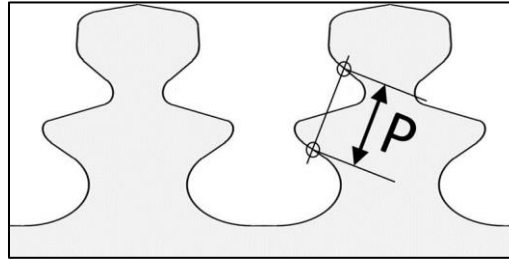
Pressure Face Spacing (P) in a Multi-Lobed Axial Blade Attachment Slot
